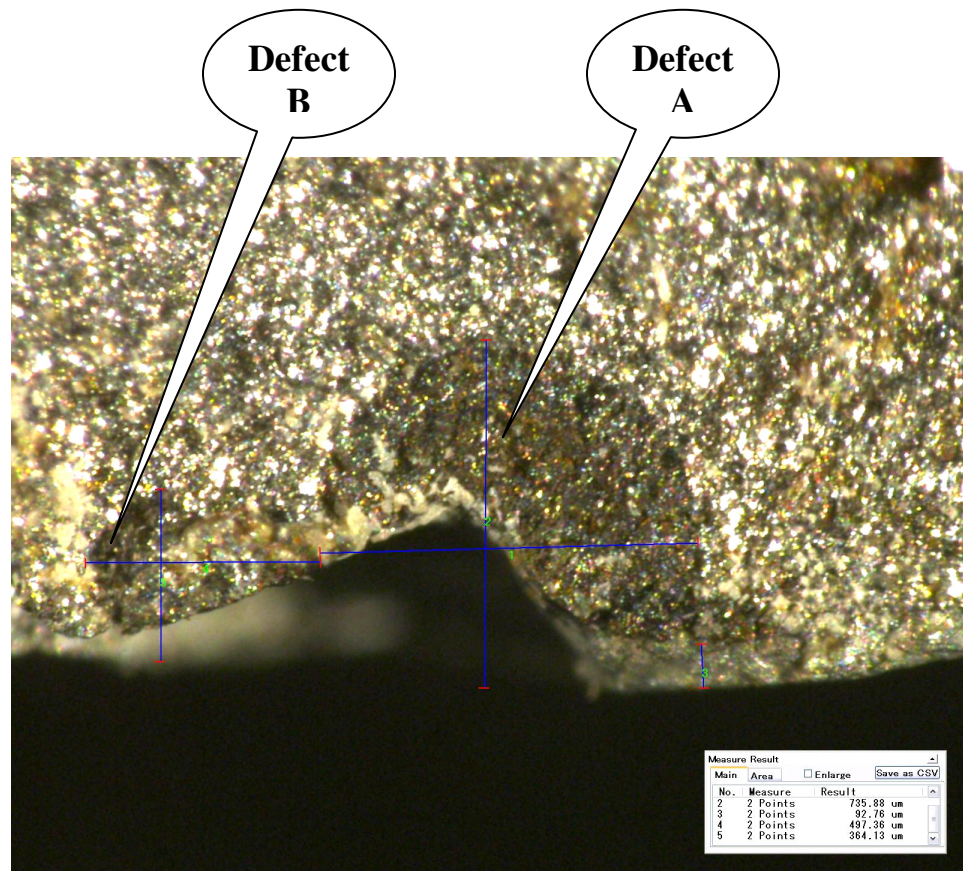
Fracture surface showing chevron lines radiating from a small flaw at the bottom of the photo.
